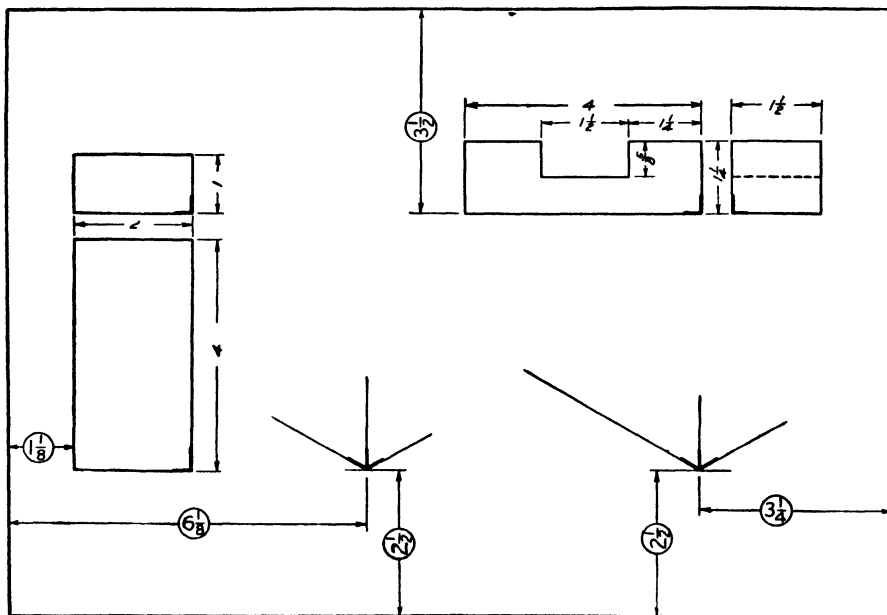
Isometric drawing. Probs. 326 and 327.
